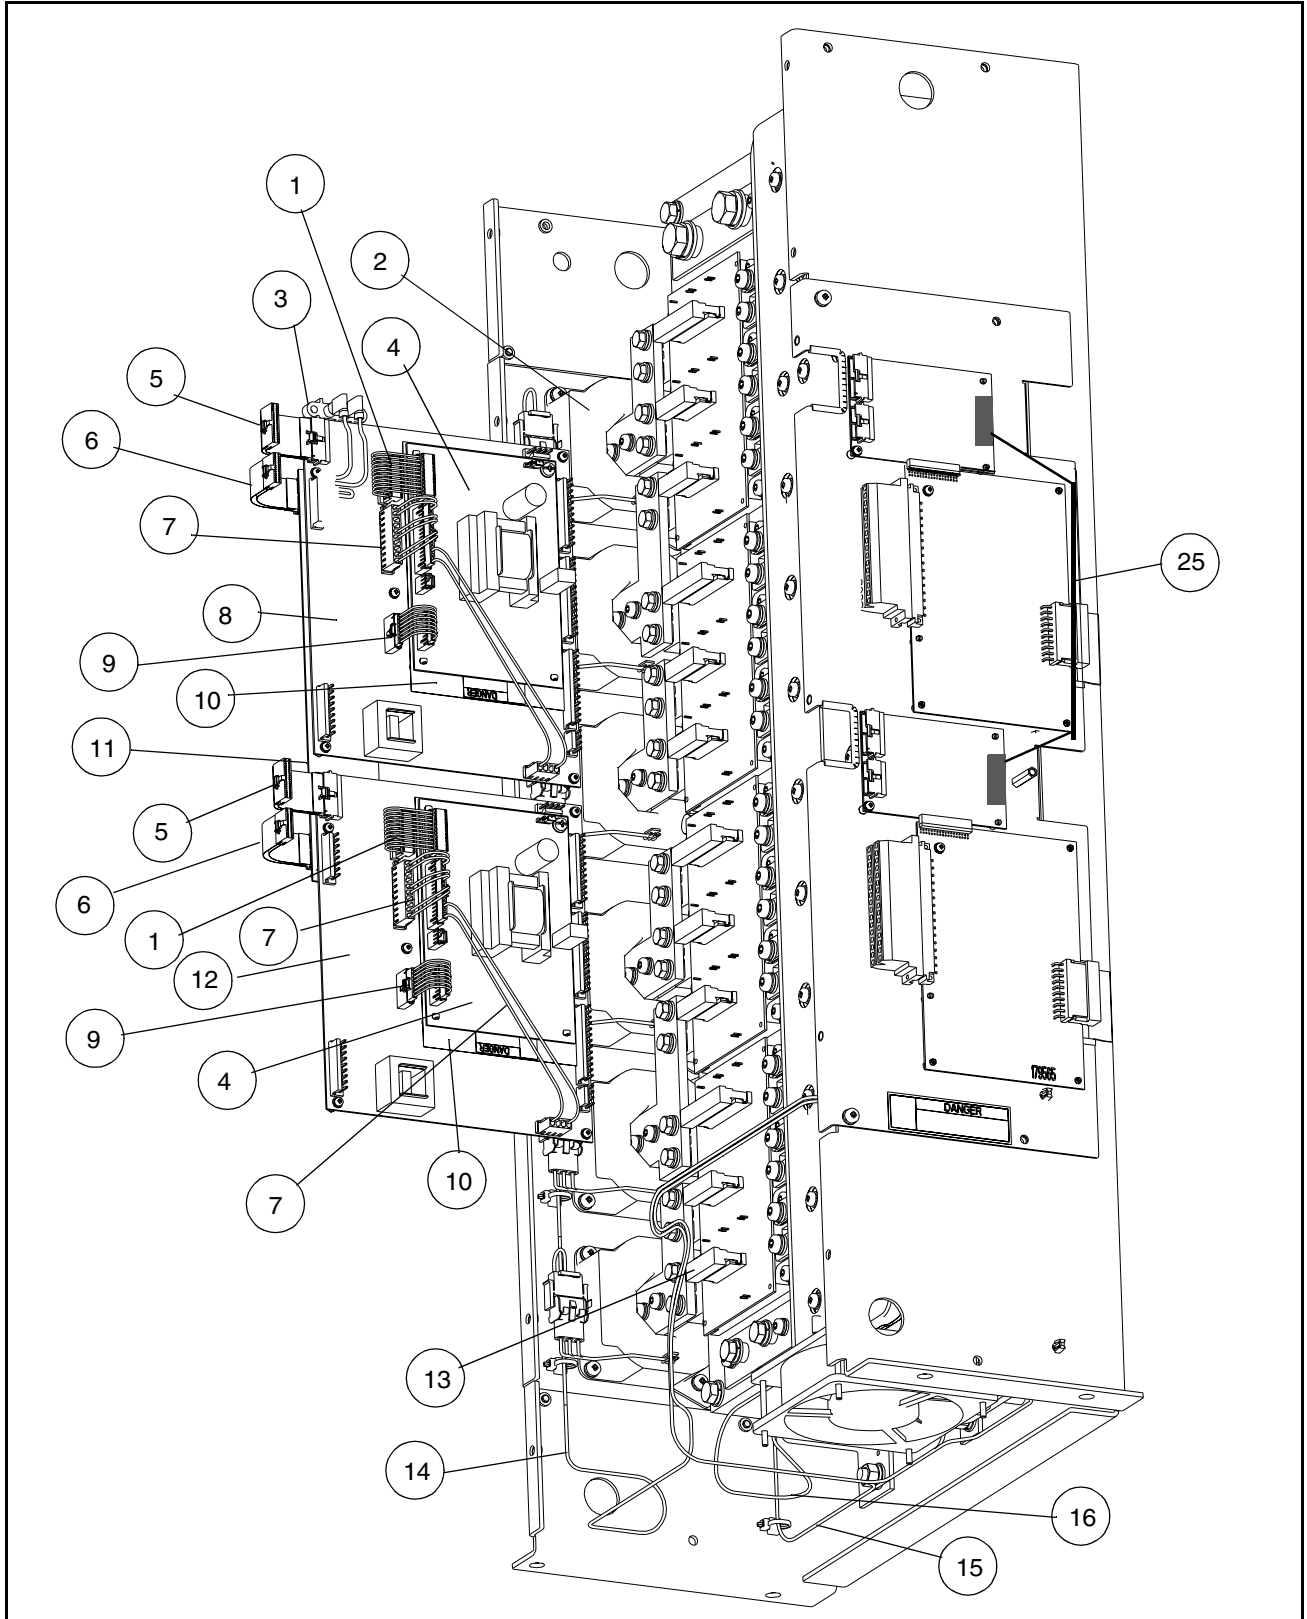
Power Module Component Locations - Door Open (Frame 3)
